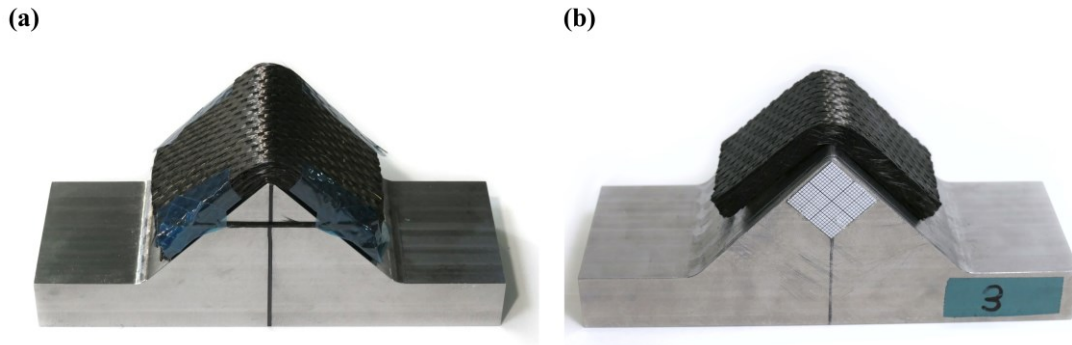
Non-planar preform manufacturing process: (a) stacked and fixed layers on the lower tool; (b) after preforming and cutting into final dimensions.
